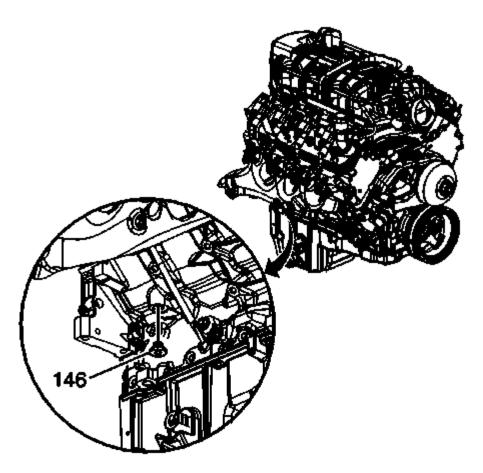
View Of Engine Block Coolant Drain Hole Plug Courtesy of GENERAL MOTORS COMPANY
